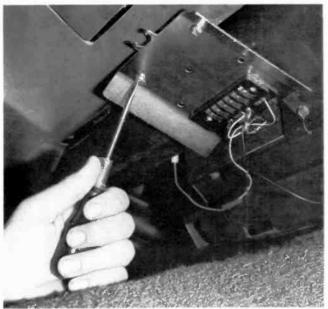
STATIONARY SECTION of silde mount is secured under the dash using sheet metal or machine screws.
